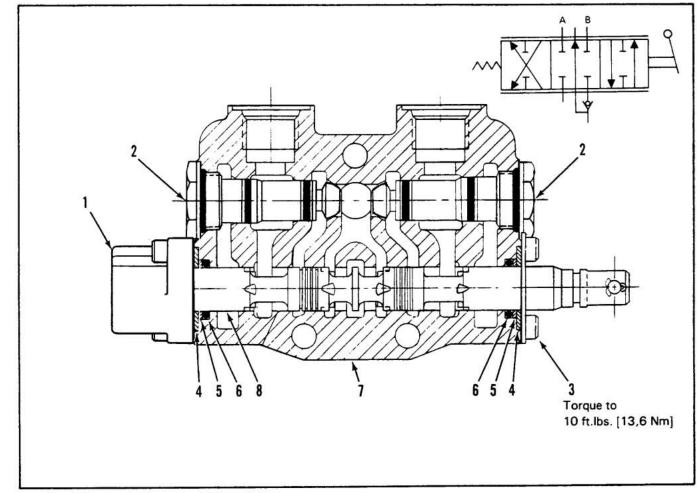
4-Way, 3-Position Tandem Valve Section (shown with 4-way spool).
